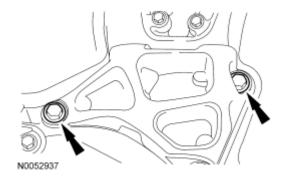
Locating Upper Engine Mount Bracket Bolts Courtesy of FORD MOTOR CO.
